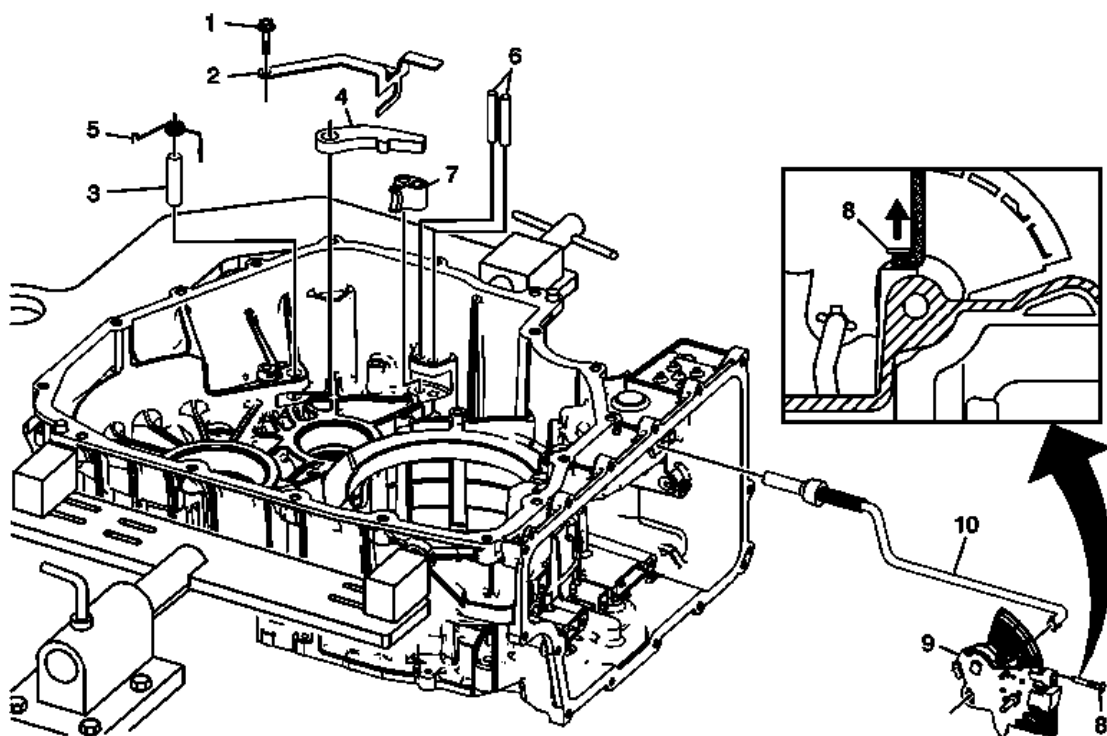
Identifying Manual Shift Detent Lever With Shaft Position Switch Assembly & Park Pawl Actuator
